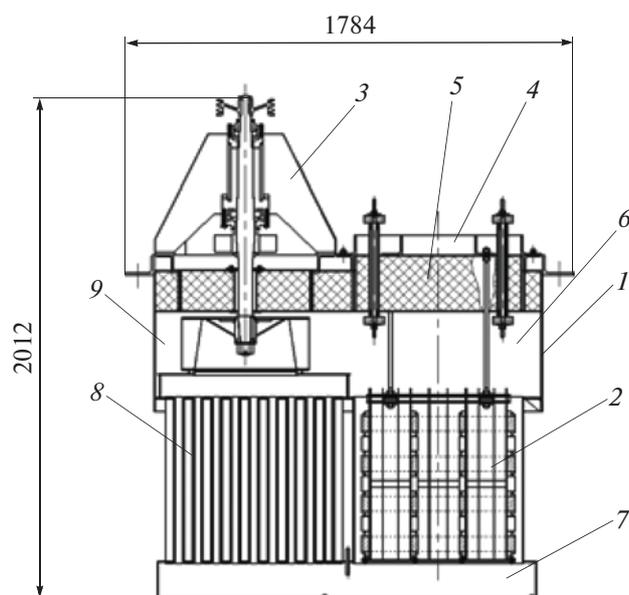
Closed electric heater with radiant–convective heat transfer: 1) housing; 2) suspended attachment system for heating coils; 3) custom-designed circulatory fan; 4) supporting flange; 5) heat-insulating layer; 6, 7) upper and lower passageways; 8) tubular heat exchanger; 9) built-in helical fan housing.
